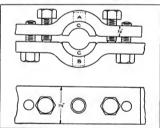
Grinding Tool for Crankplus and Wristplus Where Grinder is Not Available.
